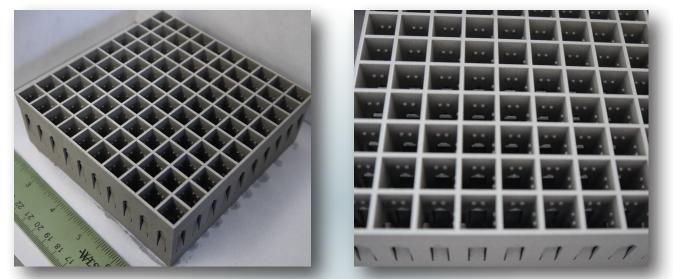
Inconel 600 10x10 fuel rod spacer grids fabricated using DMLS demonstrating the structural detail that can be achieved
